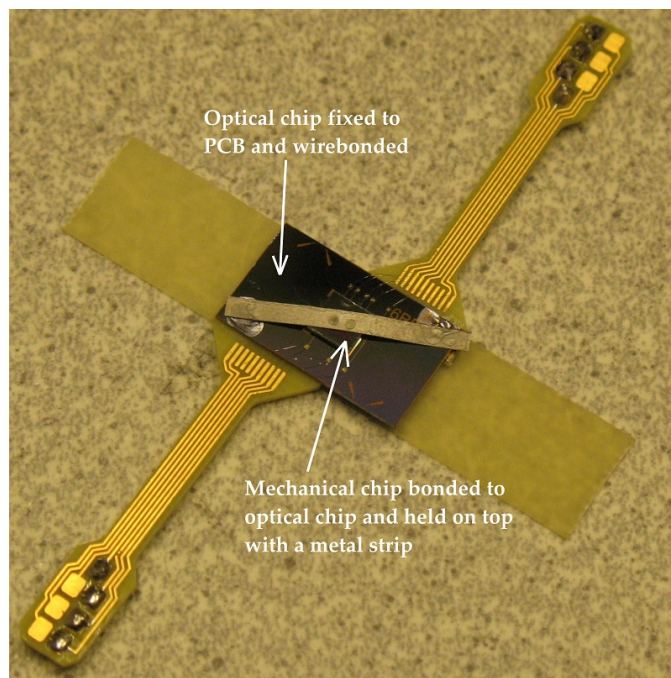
Image showing the clamped/bonded mechano-optical modulator and wire bonded to a PCB
